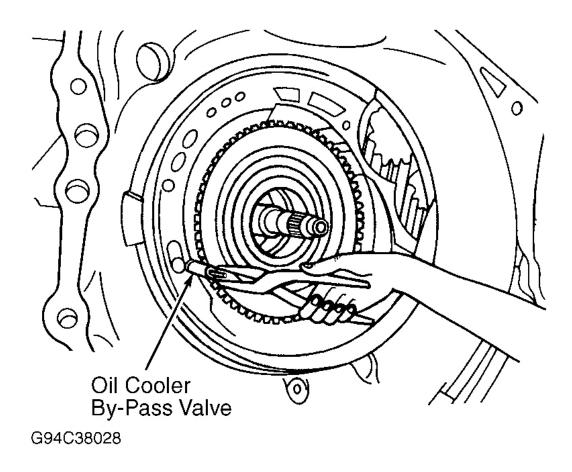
Removing & Installing Oil Cooler By-Pass Valve Courtesy of CHRYSLER CORP.
